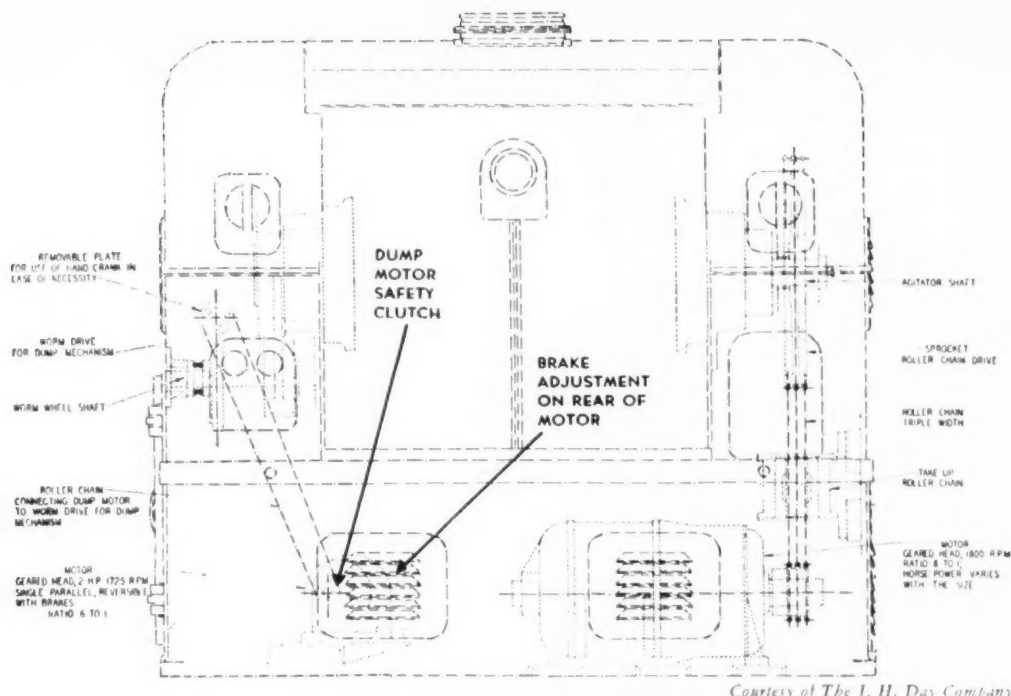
Drive view of a Day Hercules Type "B" dough mixer showing details of the operating mechanisms.
